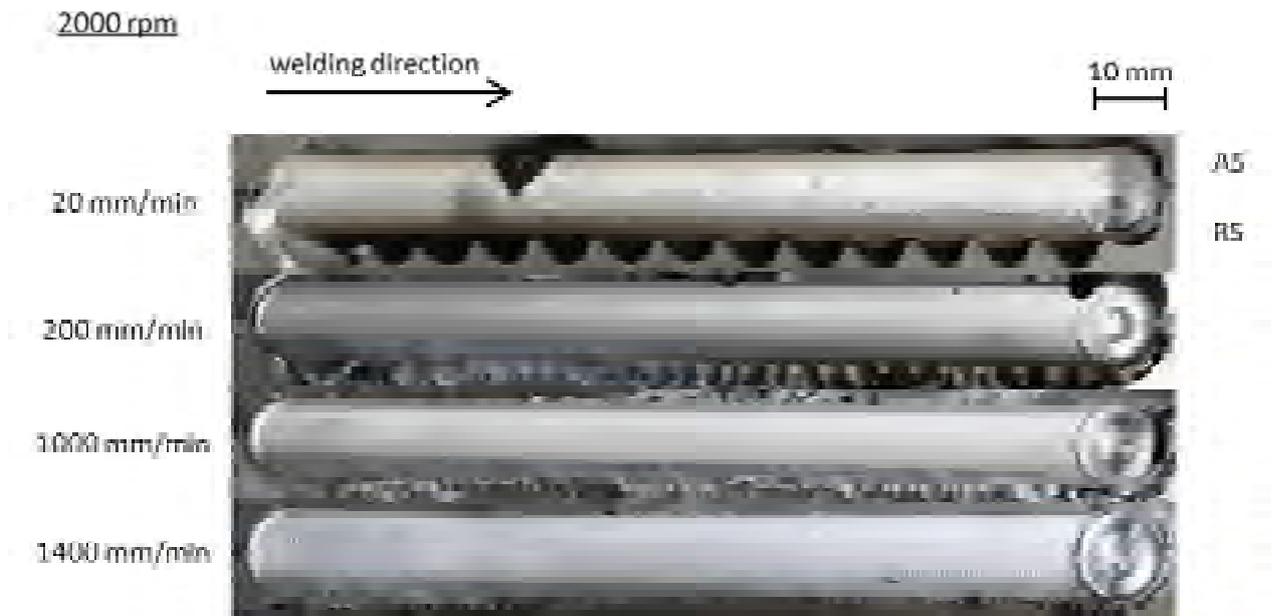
surface appearance of LAFSW of extruded AZ31 for different welding speeds at constant rotational speed.
